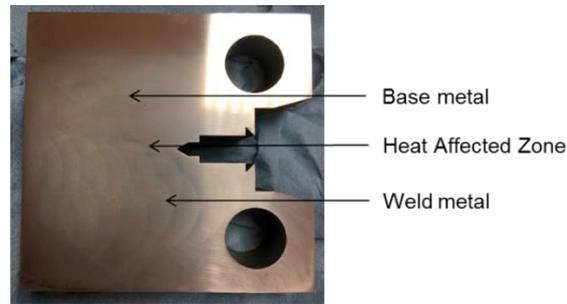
C(T) specimen extracted from the welded slice
